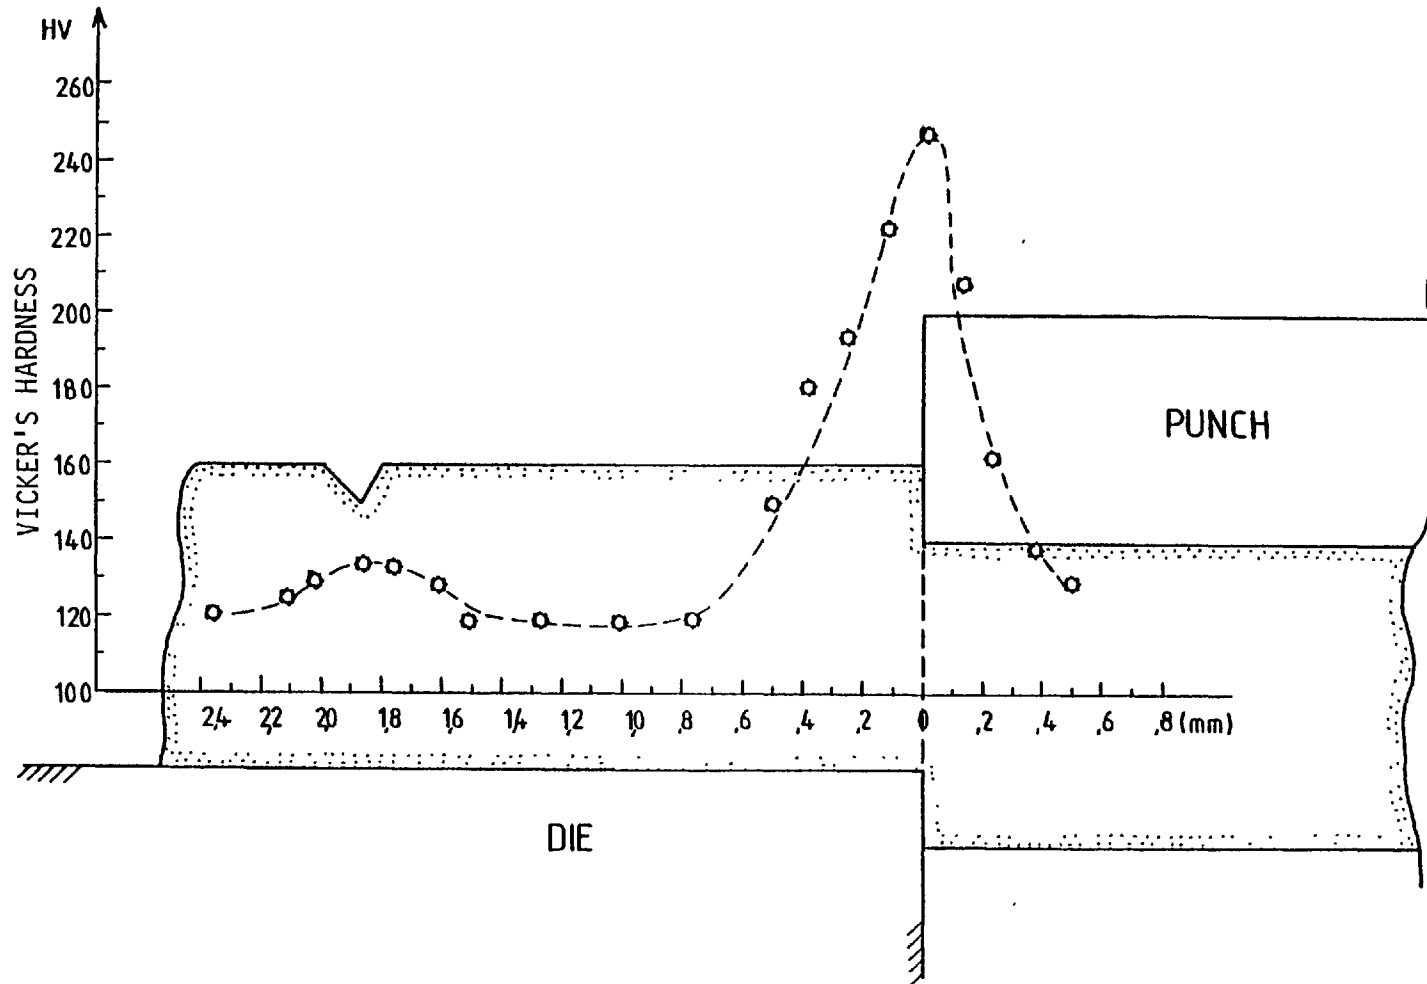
Hardness values along the radial direction of a partly blanked strip of mild steel of thickness $t = 0.120$ in. (3.04 mm) at a punch penetration of $PP = 0.055$ in. (1.39 mm) when a clamping force of (CF = 70 kN) acted at a clamp/punch diameter ratio of $CR/PR = 1.28$.
